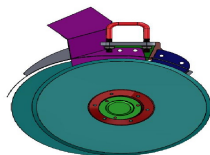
A. FLAT DISC TYPE FURROW OPENERS IN MACHINE
